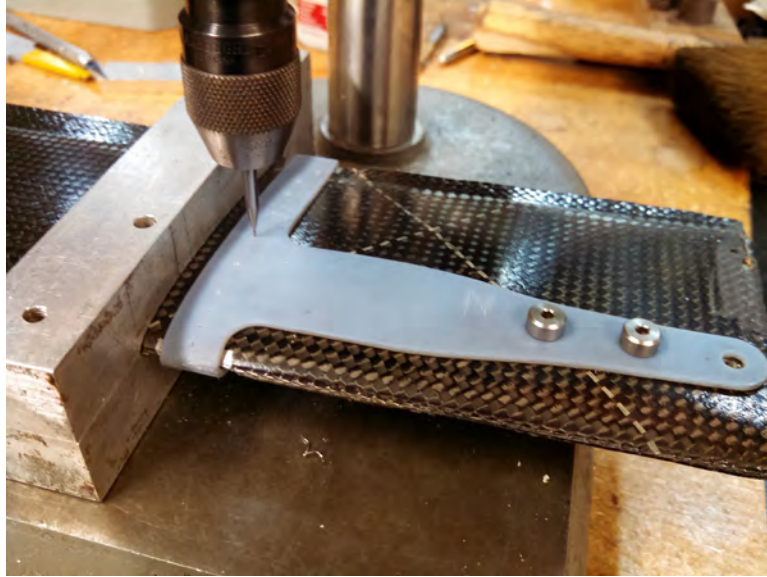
Before removing the skin, a 3D printer template for the pressure port hole locations is placed on the blade, and the port holes are drilled through the skin and partially into the core.
